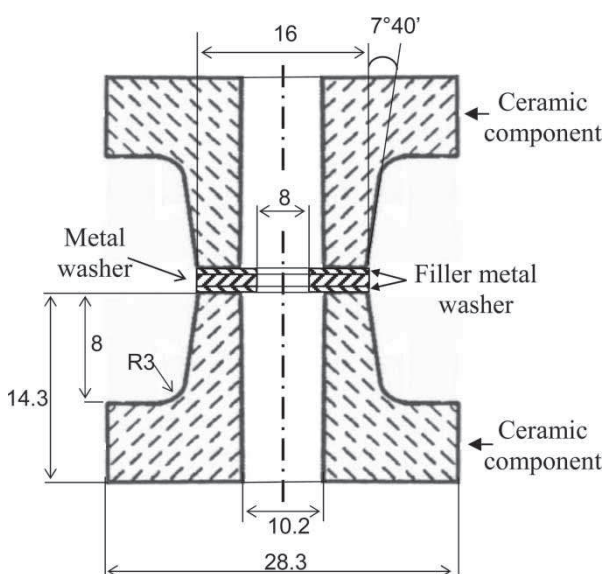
Tensile specimen geometry of ceramic metal seal (distances in millimetre)
